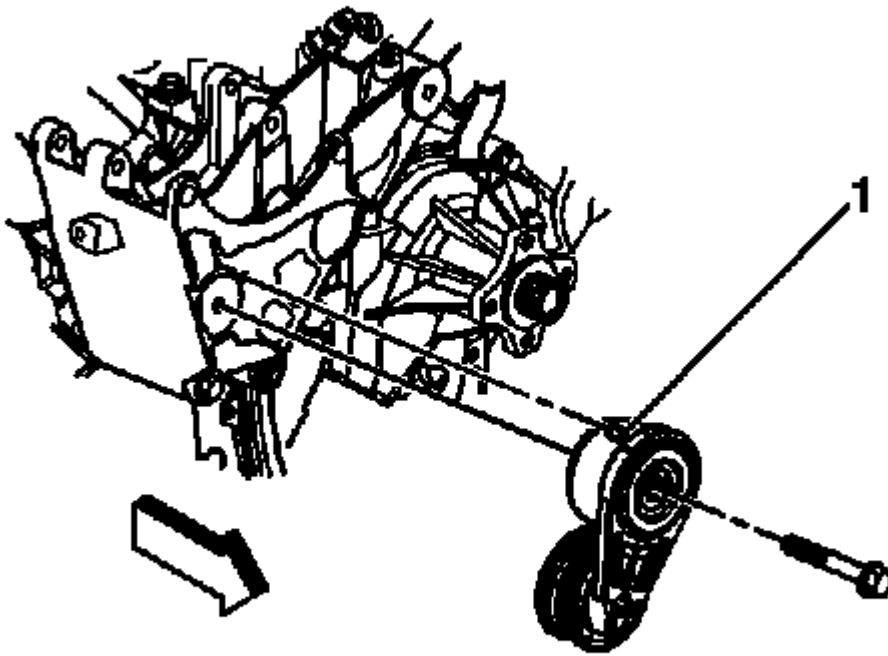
View Of Drive Belt Tensioner Locating Pin
